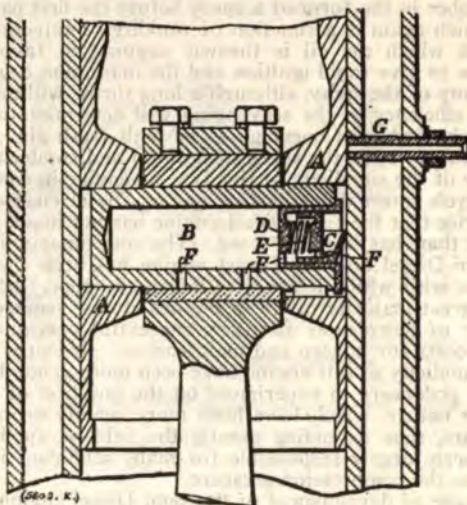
Lubricating Oil Collector for Gudgeon Pin.
